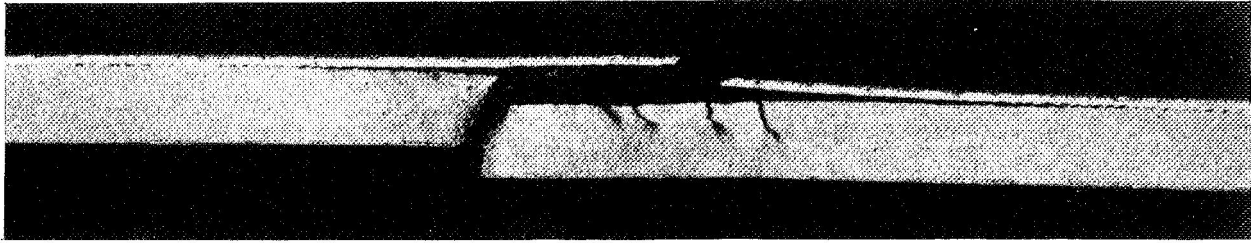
TYPICAL EXPLOSIVELY WELDED 0.008-INCH STAINLESS STEEL/0.050-INCH Ti-5Al-2.5Sn (ELI) SPECIMEN FAILED BY FATIGUE
